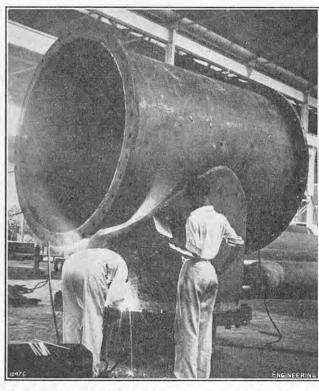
Welding Flange on 72-In. Tee for Circulating Water Main.
